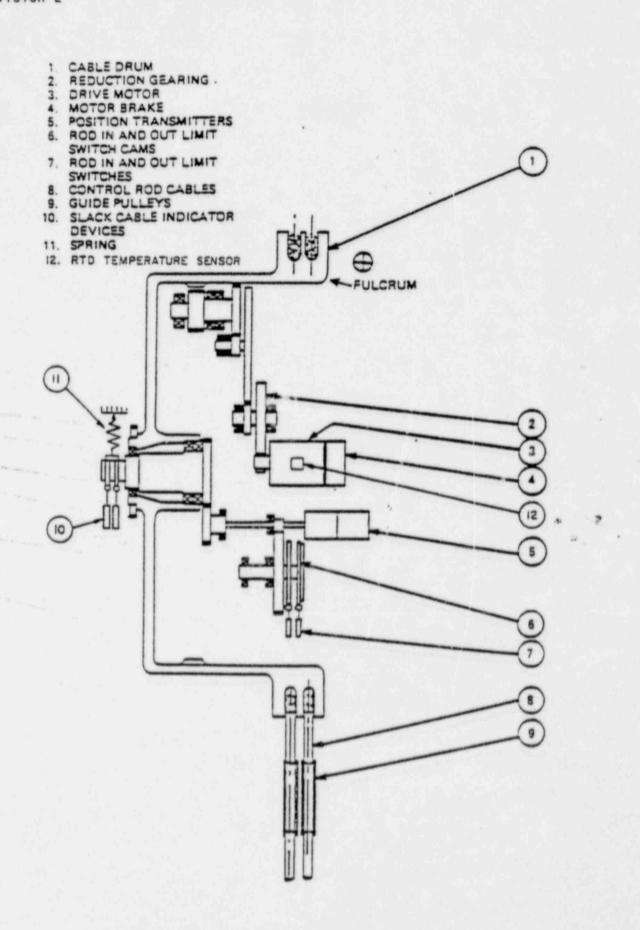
Control Rod Drive Mechanism Schematic
